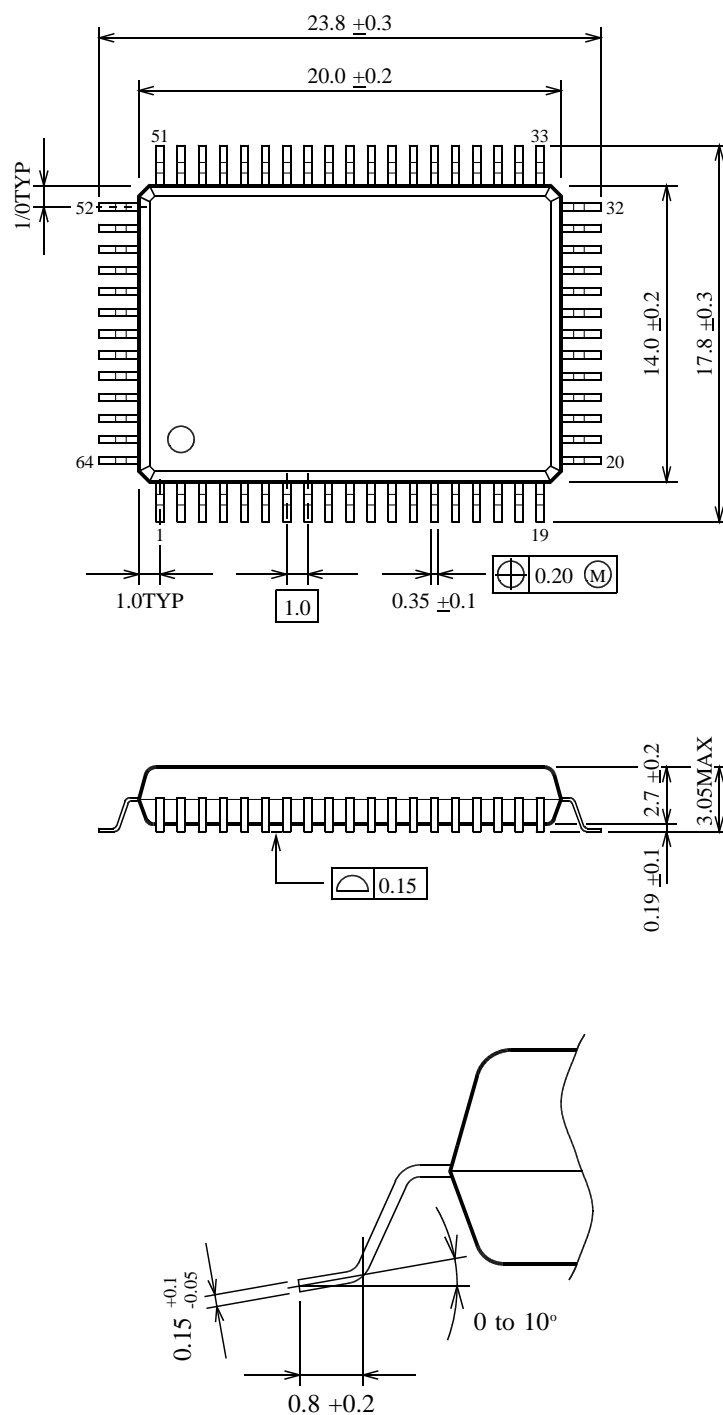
(Outline Drawing of PPMC-111CFP)
